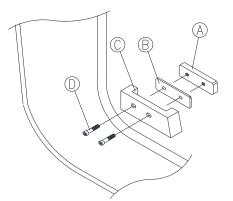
Cutting Blade, Shim, Base, Bolts
